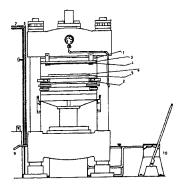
Hydraulic Press. 1. Top platten, 2. Bottom platten, 3. Top plate, 4. Highly polished sheet, 5. Bottom plate, 6. Fresnel Master, 7. High pressure steam line, 8. Heat insulation, 9. Water line, 10. Hydraulic control valve.
